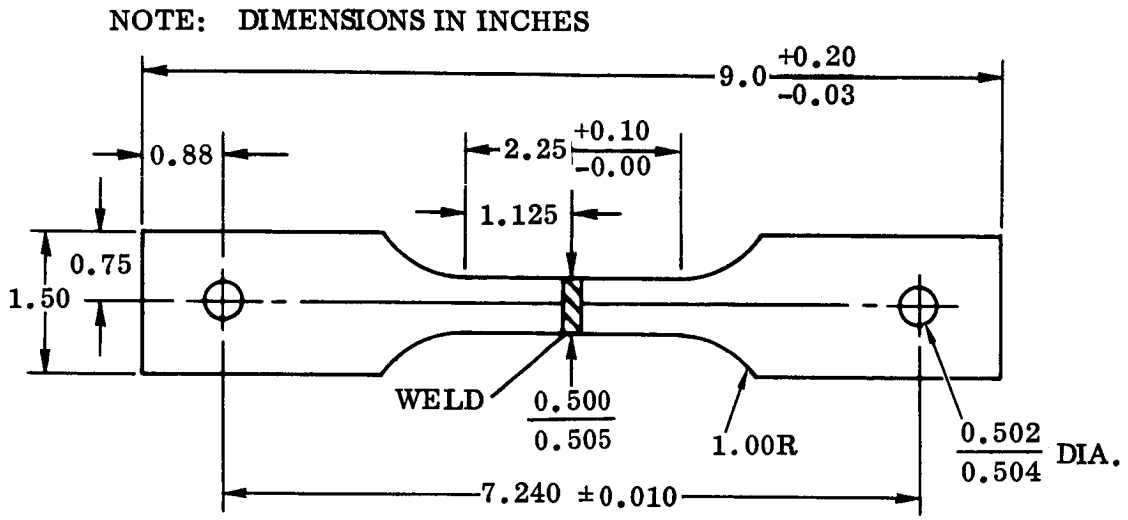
Weld Tensile Specimen of 0.063-Inch Thick 2219-T81
